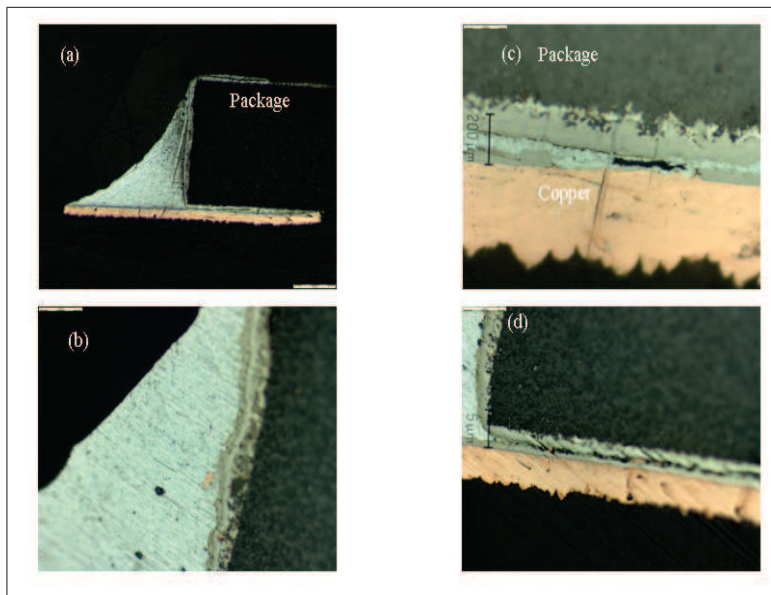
Solder's (SnPb) microstructure, (a) One solder joint, (b) A micro-section from the fillet, (c) A big hole probably due to the lack of enough solder, moreover the intermetallic is not continuous, (d) Thickness of the solder under the package.
